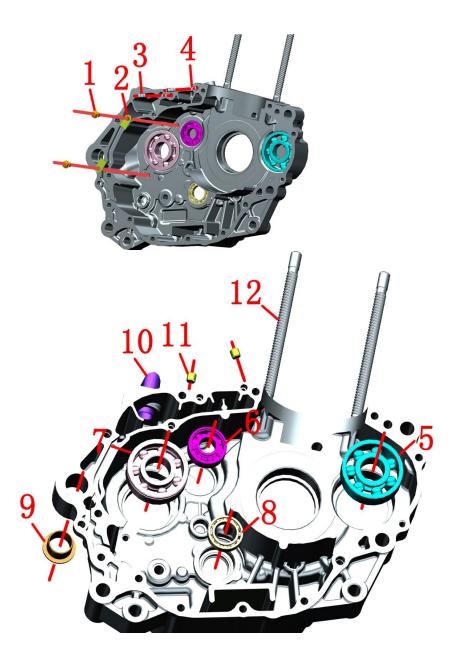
LEFT CRANKCASE		Left crankcase disassembly 2	CHK	(0)
